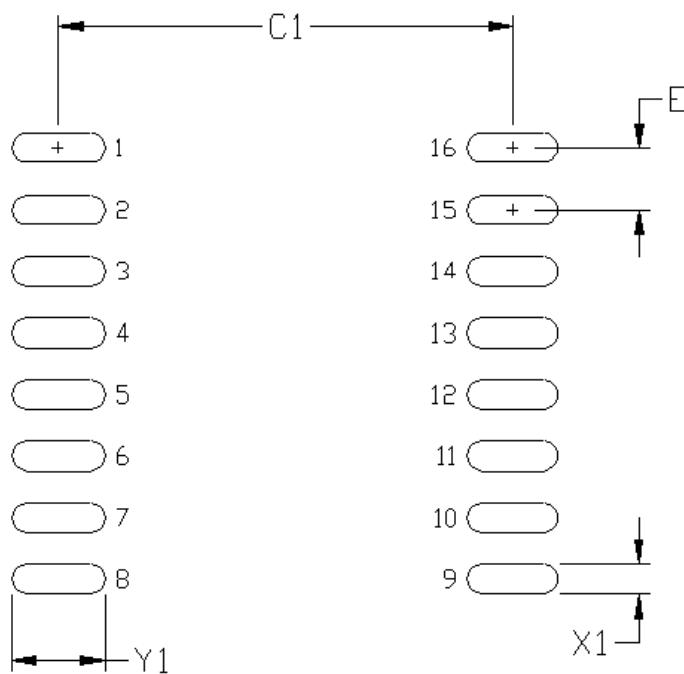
16-Pin Wide Body SOIC PCB Land Pattern
